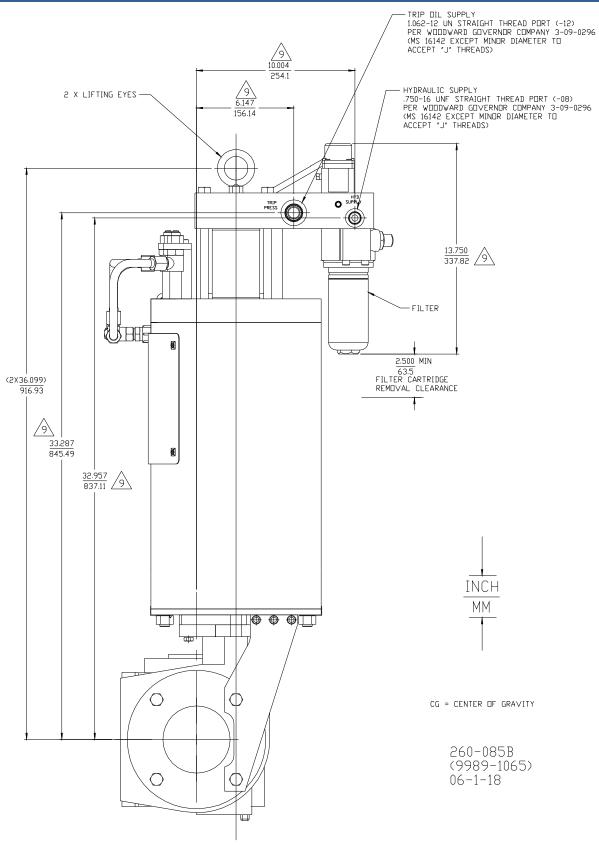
Gas Stop/Ratio Valve Outline Drawing (6-inch, with 3 LVDTs, SS-260)
